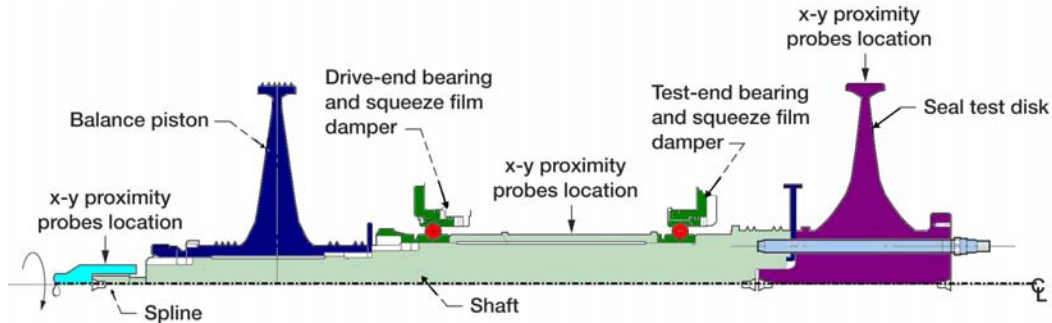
Seal Test Rotor Showing X-Y Proximity Probe Locations
